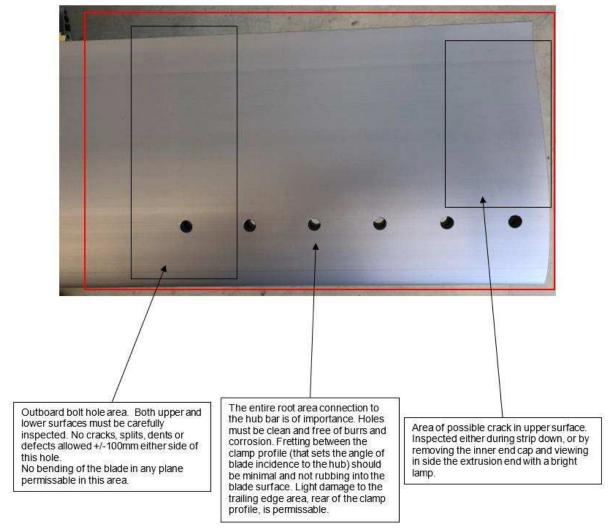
View of the tope side of the rotor root (RSII, 6-hole attachment)
